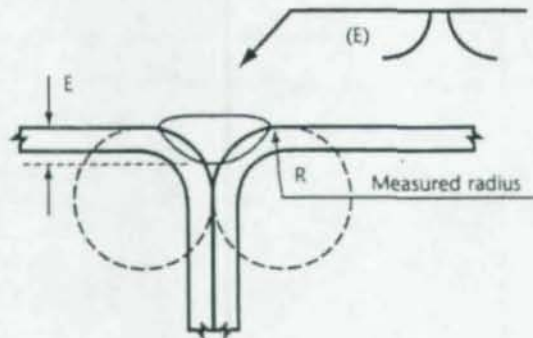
CSA W59 Pre-ballot Draft (Nov. 2001), Figure 6, Partial Joint Penetration Flare-V Groove Weld in a Butt Joint (CSA, 2001)
